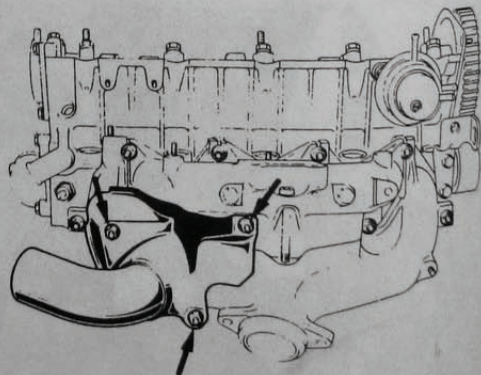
Hot air stove to inlet manifold attachments (arrowed) - 1721 cc engines (Sec 18)
